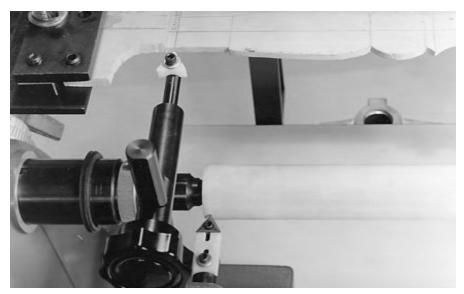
Make certain both end lines are inside the ends of the workpiece.
